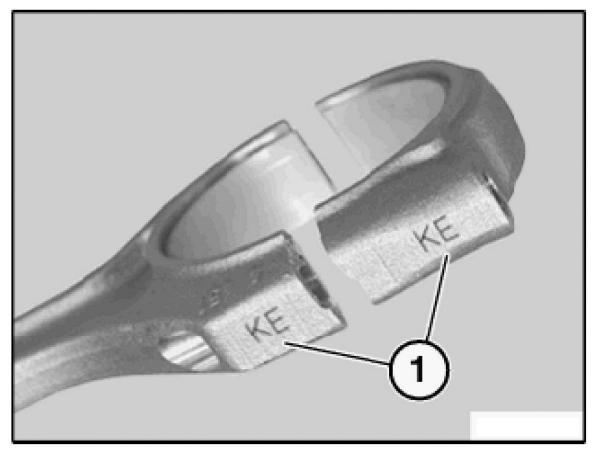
Identifying Connecting Rod Courtesy of BMW OF NORTH AMERICA, INC.
